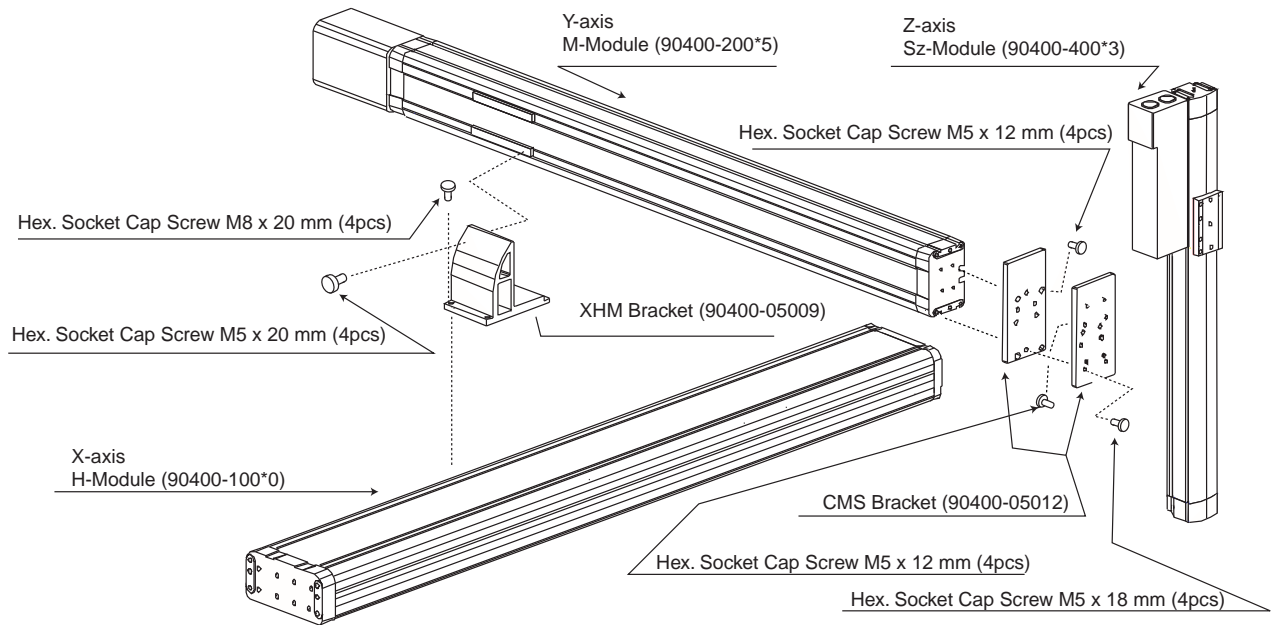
J-Type Mechanical Assembly with Z-axis Slider Stroke
